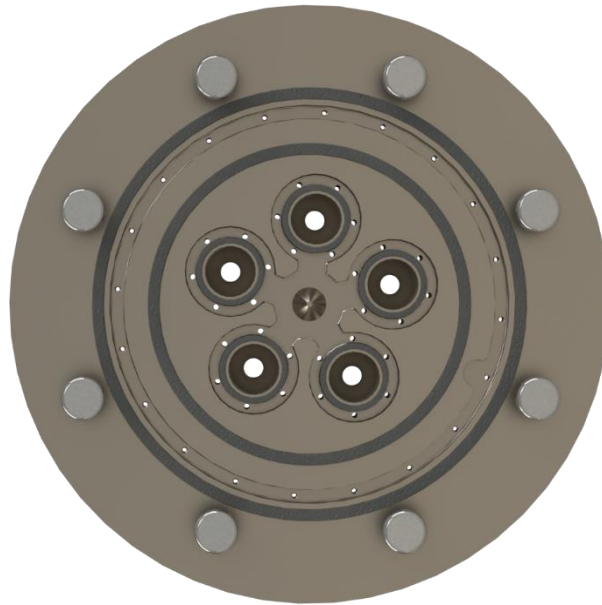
Bottom Injector layer. Pictured are the showerhead elements which inject N_2O and additional elements used for film cooling the combustion chamber.
